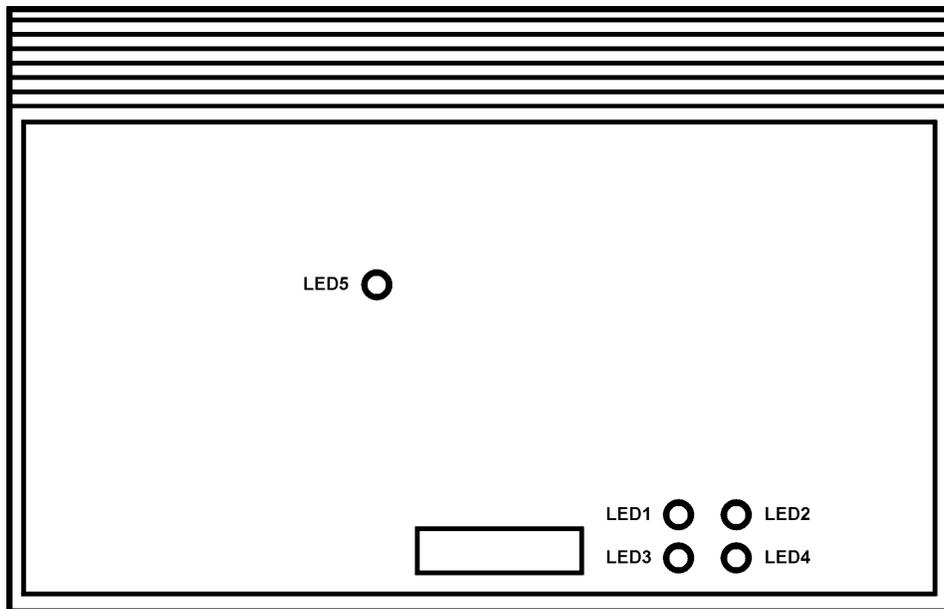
Dispenser Mechanism Printed Circuit Board.
